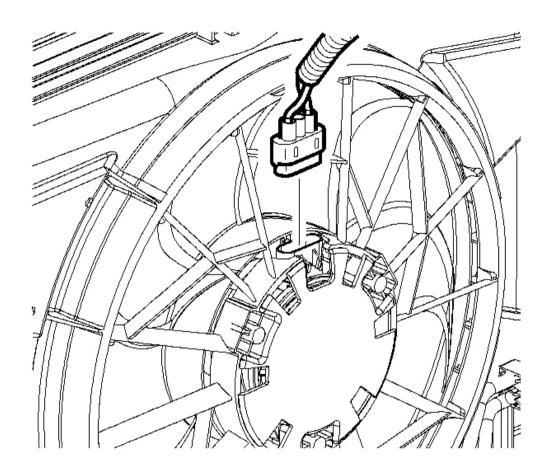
View Of Electrical Connector To The Fan Motor Courtesy of GENERAL MOTORS CORP.
